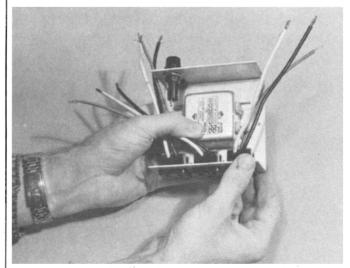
Position the RFI filter to provide adequate clearance between components. Mark location, drill holes, and mount filter. Due to their low profile, use of pop rivets is recommended to minimize the possibility of scratching the surface the filter is sitting on.
